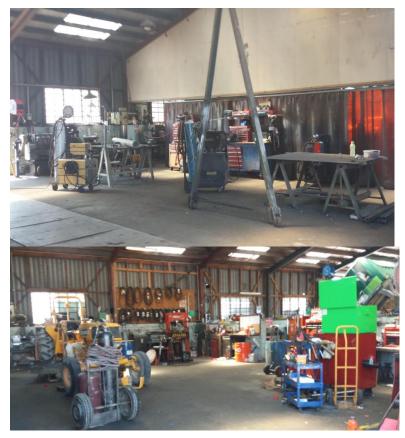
TigPro Engineering – stainless steel, mild steel and aluminium fabrication
